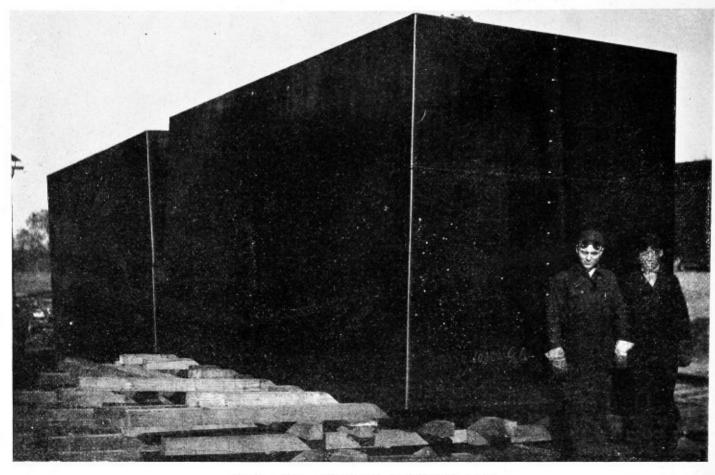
Two 10,000-Gallon Butt Welded Tanks
